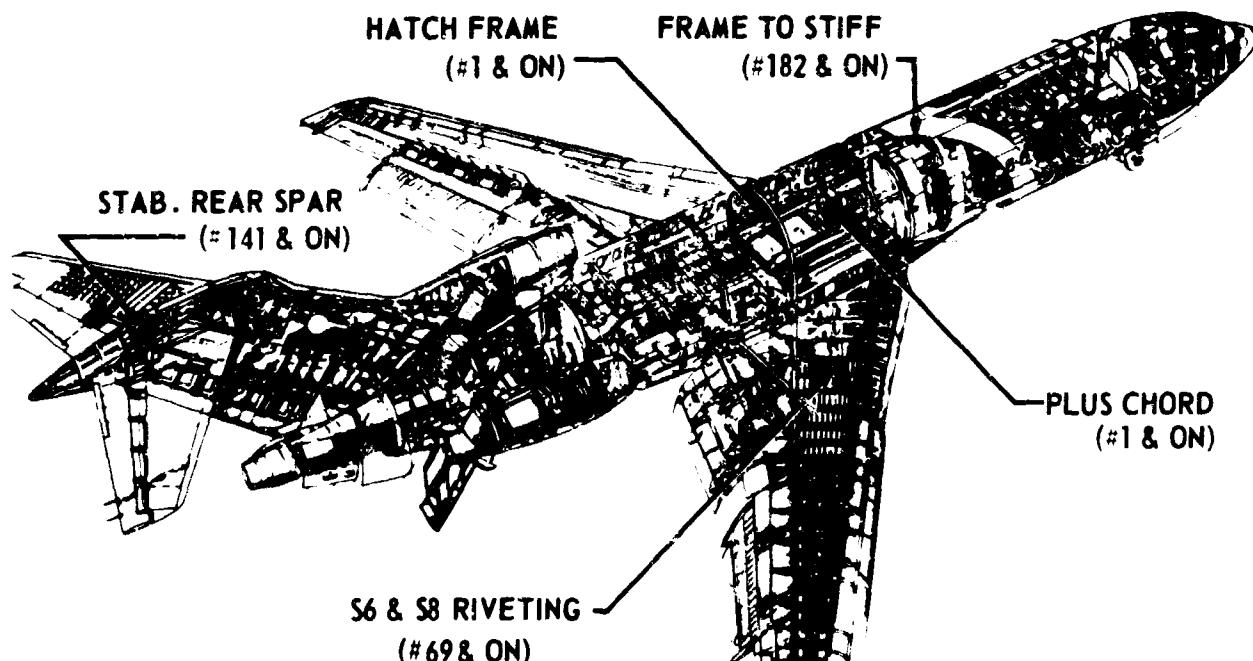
Fatigue Failure Examples During 727 Airframe Fatigue Tests
